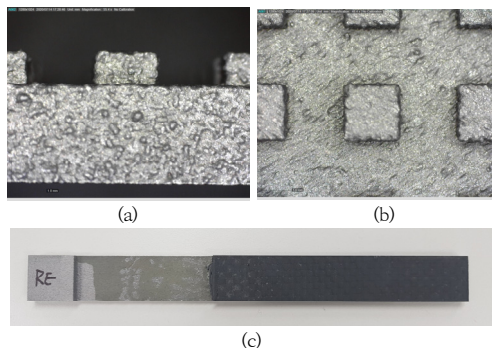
(a) Cross section and (b) upper surface of interlocking structure of metal part and (c) final test specimen
